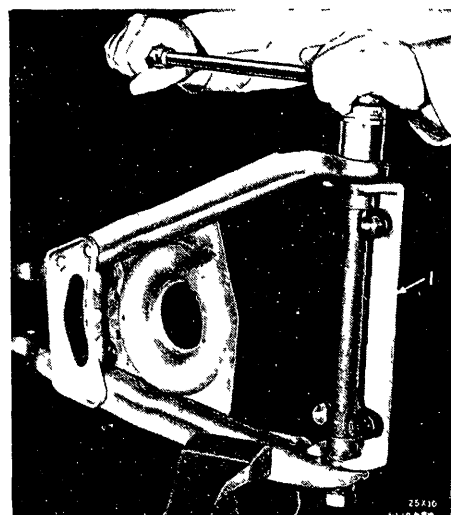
Installing lower control arm bushings, using spreader tool (1), 1940-52
